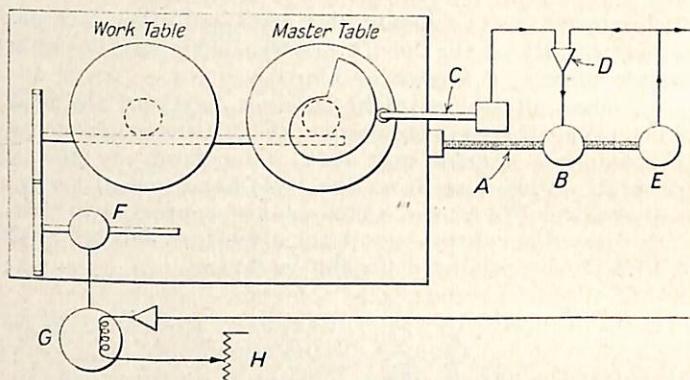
Diagrammatic Arrangement of the Cam-milling Machine as Originally constructed
